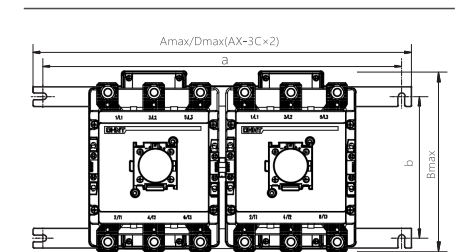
Outline and installation dimensions of NXC-265/N-630/N AC contactors
